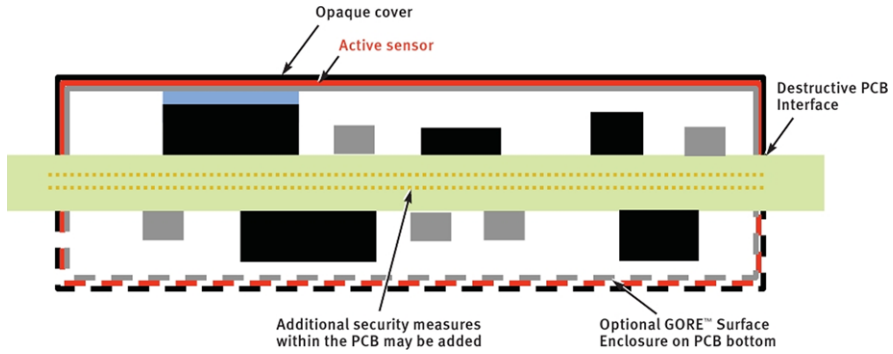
Secure PCB surface enclosure designed by Gore
